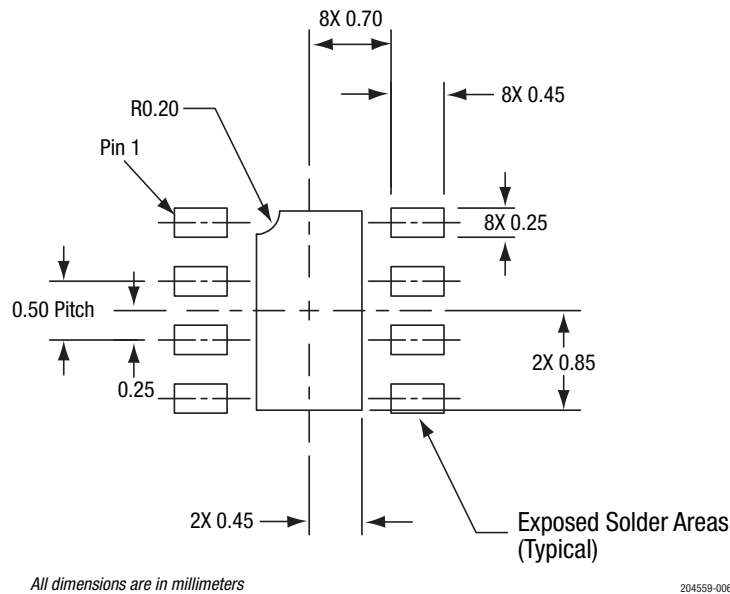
SKY67154-396LF PCB Layout Footprint (Top View)
